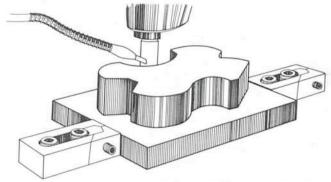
This is a schematic illustration of a complicated piece being milled on the machine table.
